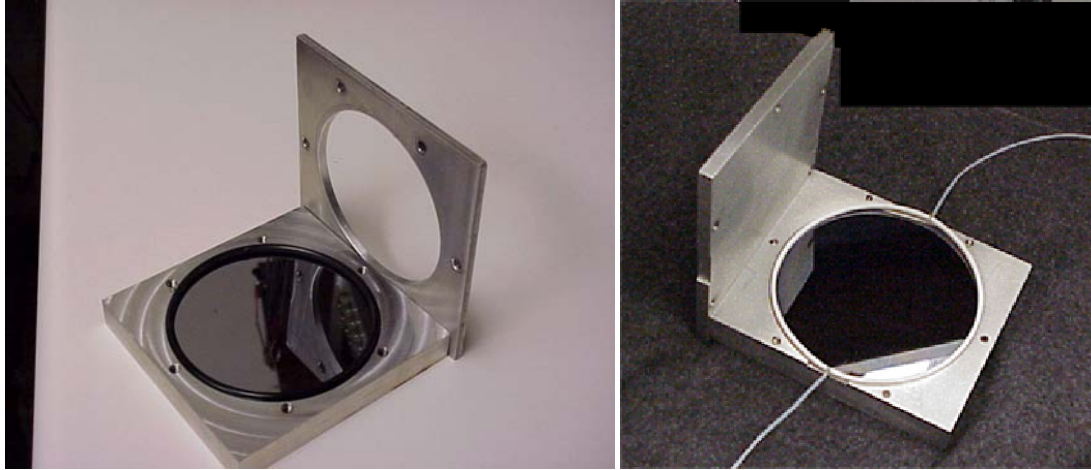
Shown are aluminum mold plates for open and closed mold casting.
